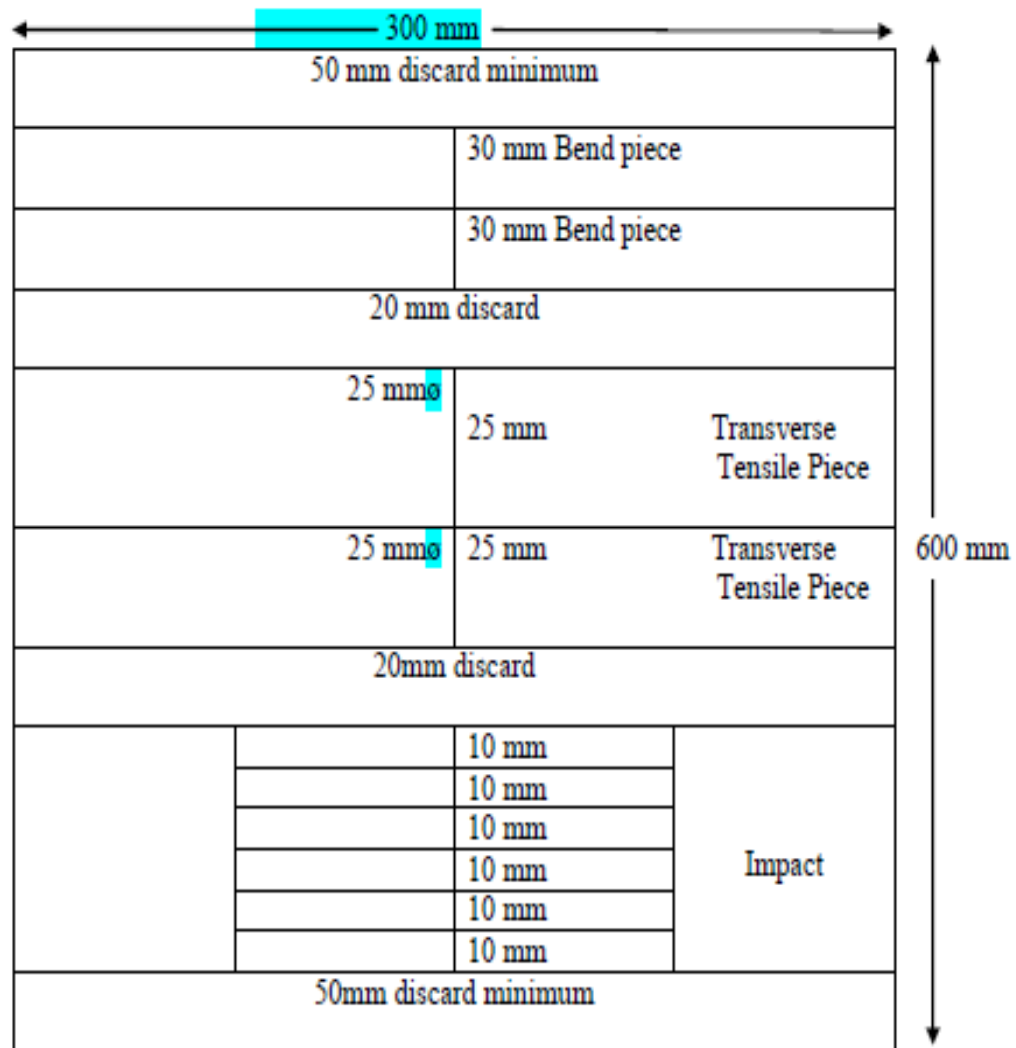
Preparation of different test pieces from Two Run Weld Assembly.
